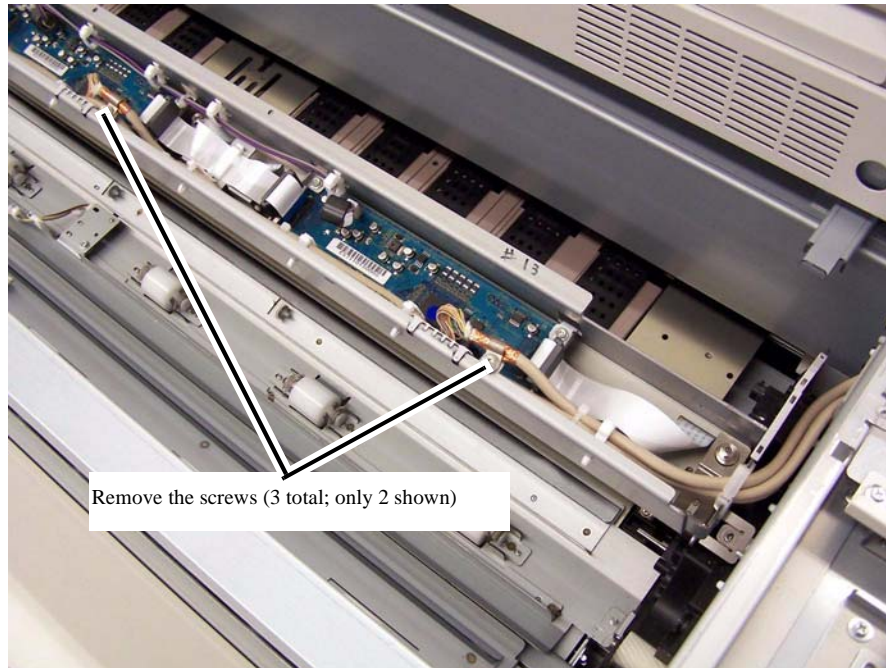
Removing the screws that secure the P-clamps to the LPH frame
